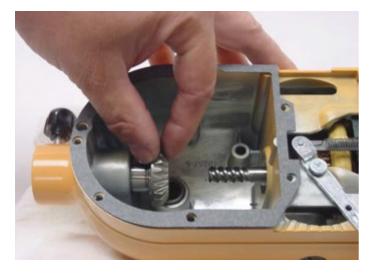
The attachment hub bevel gear being pushed into the attachment hub bearing from inside the gearcase.
